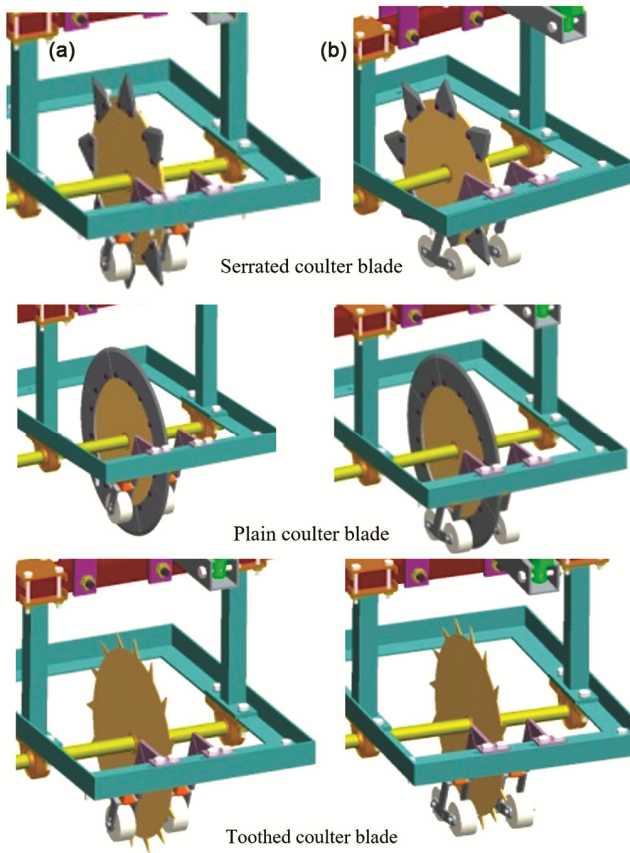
CAD view of different straw cutting devices, including serrated, plain, and toothed types (from top to bottom), equipped with (a) a pair of single press wheels and (b) a twin press wheel assembly (from left to right).
